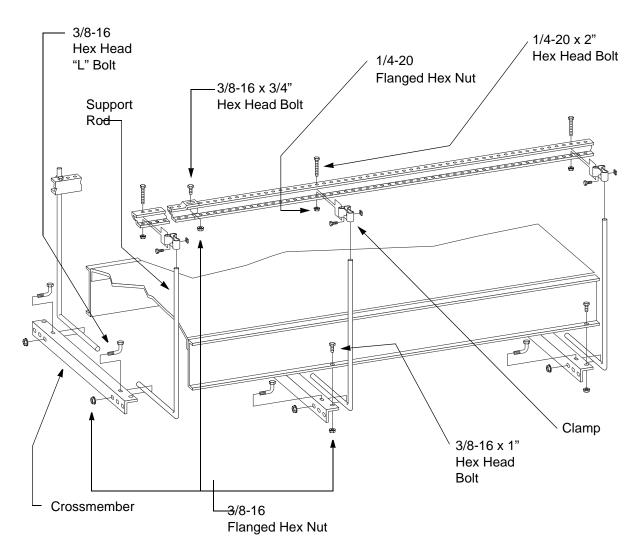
Single Channel Adjustable Side Guide (Exploded View)
